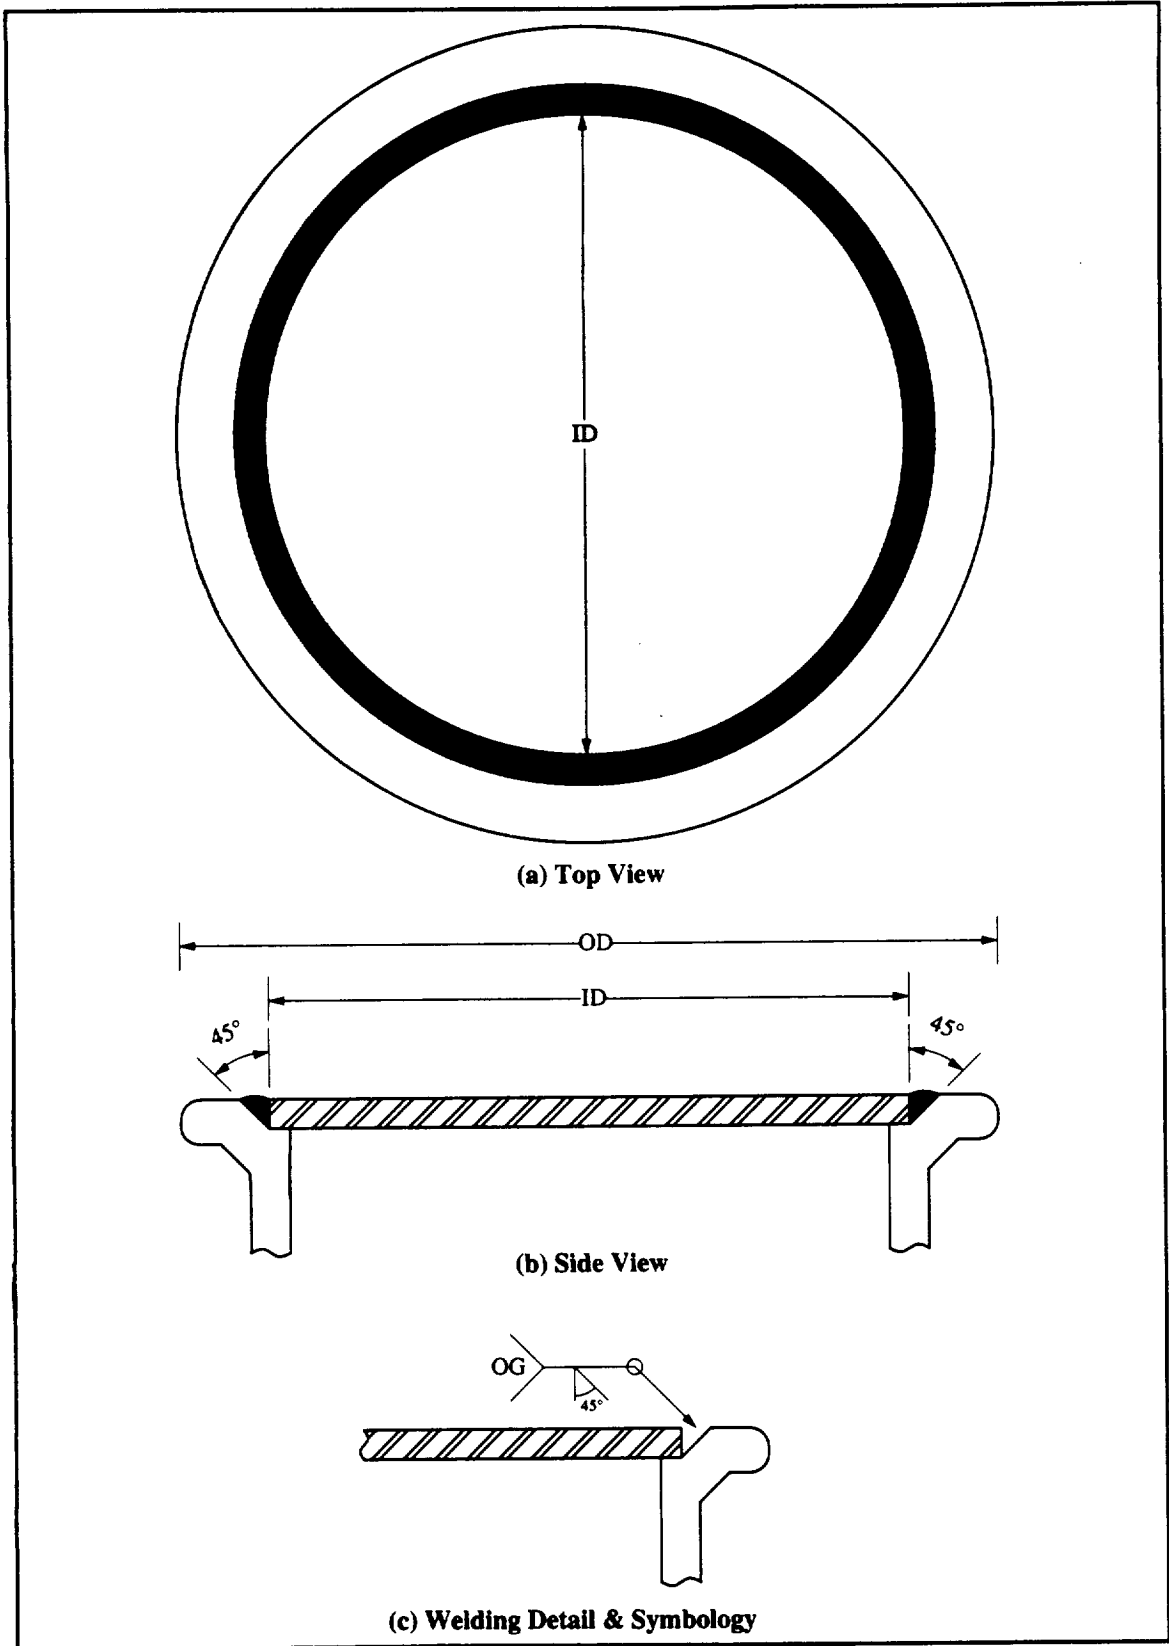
Cylindrical Pressure Vessel: Flat Circular Cover Plate Design
